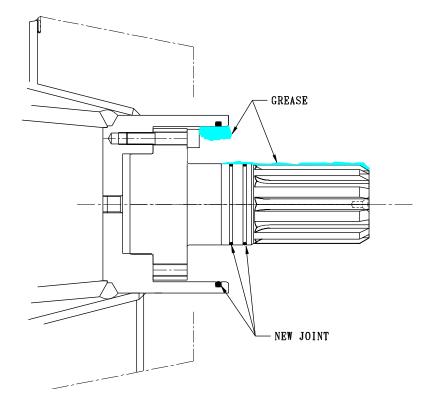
Fitting the Grooved Shaft into the Front Hub
